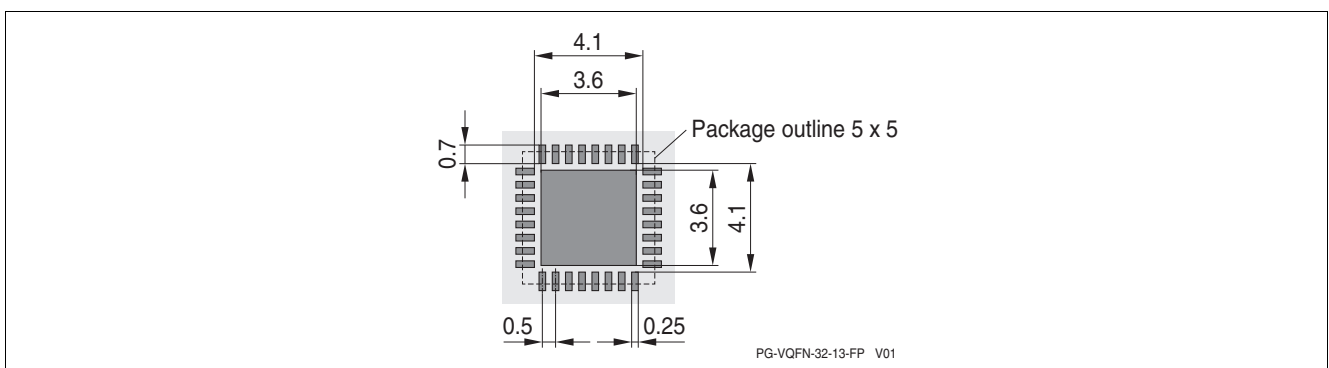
Recommended Footprint PG-VQFN-32-13
